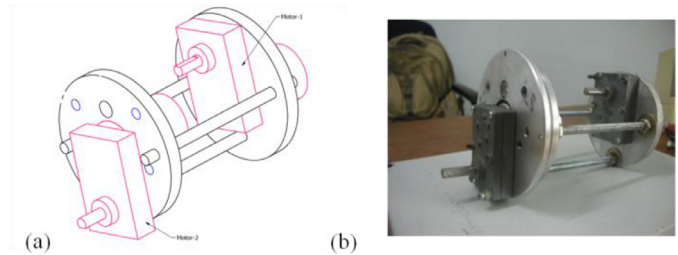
(a) CAD model of motor assembly (b) fabricated model of motor assembly.
